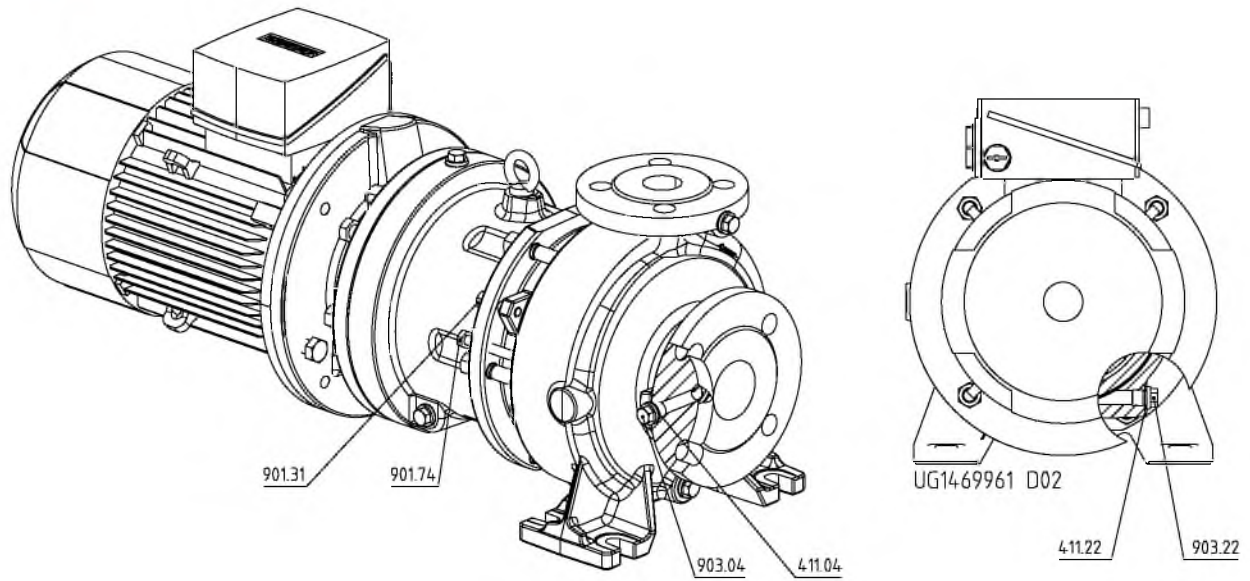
Fitting the discharge cover on the pump casing on designs with bolted cover
